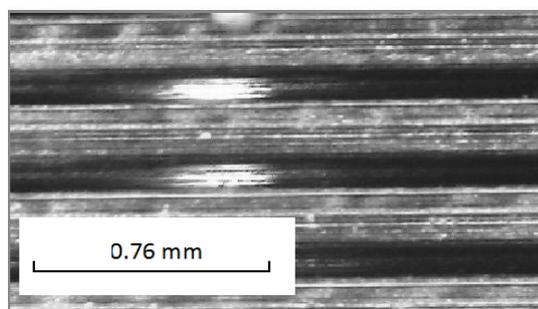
Geometrical micro-irregularities for sample 6 machined with 0.584 mm/rot feed
